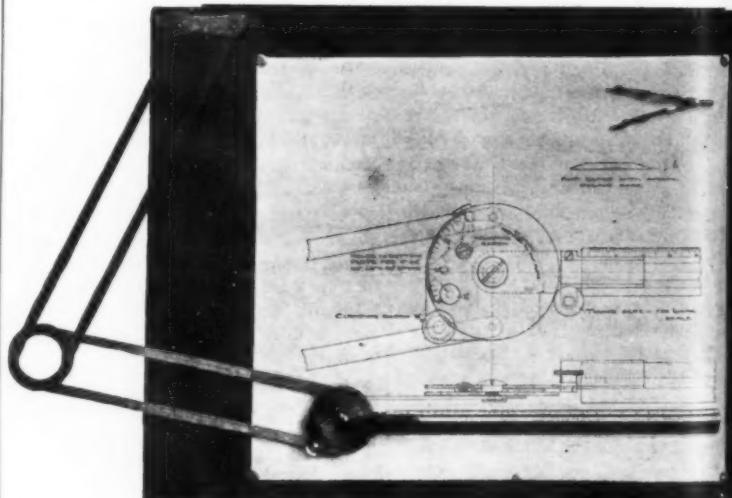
UNIVERSAL DRAUGHTING MACHINE.
